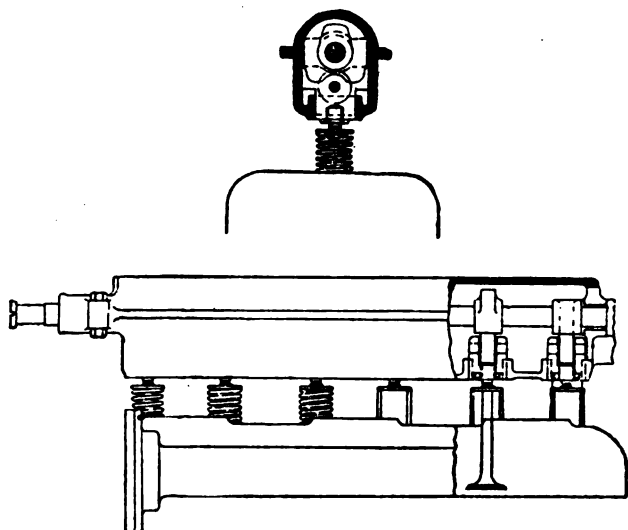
Valve Operating Gear of the Maudsley Engine of 1902
